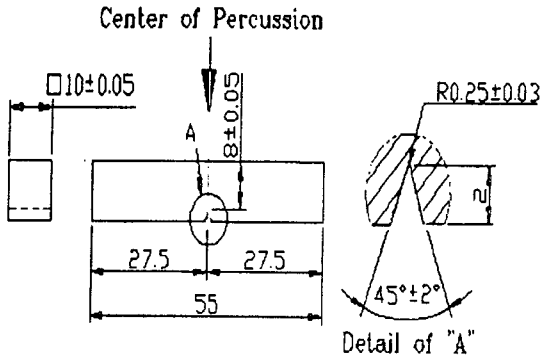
Charpy impact test specimen of underwater welded joints
